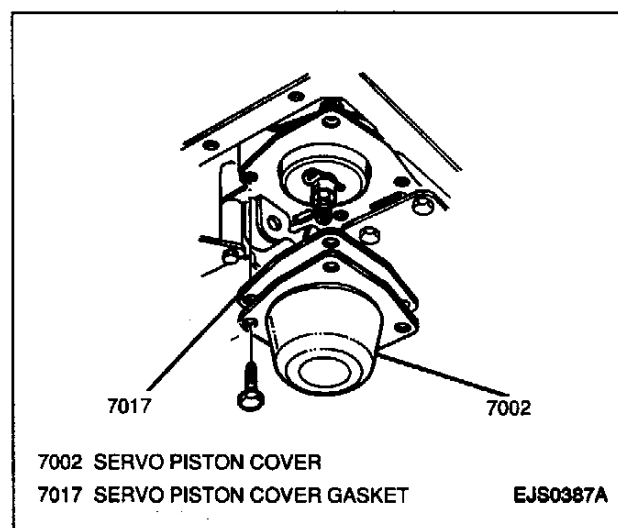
Installing Servo Piston Cover and Gasket (3L30, 3-Speed)
